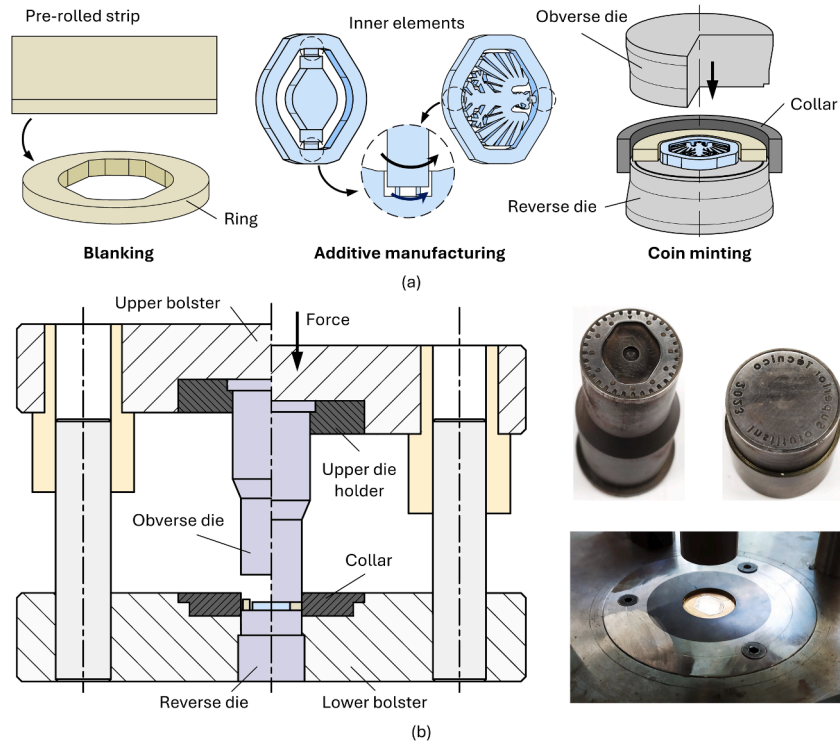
(a) The hybrid manufacturing route used to produce bi-material collector coins with free-rotating inner elements. (b) Schematic representation of the laboratory tool system used to produce the collector coin prototypes with photographs of the active tool parts.
